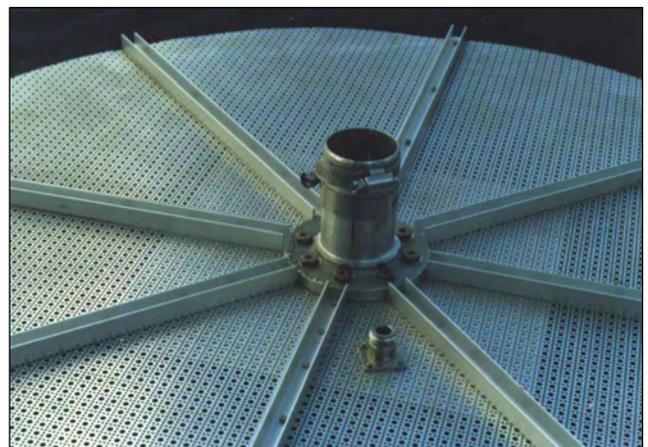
The method of reinforcing the reflector screen with aluminum channel stock. In this version of the antenna, the three angle brackets of Fig 51 have been replaced with a surplus aluminum flange assembly. (WOCY photo)
